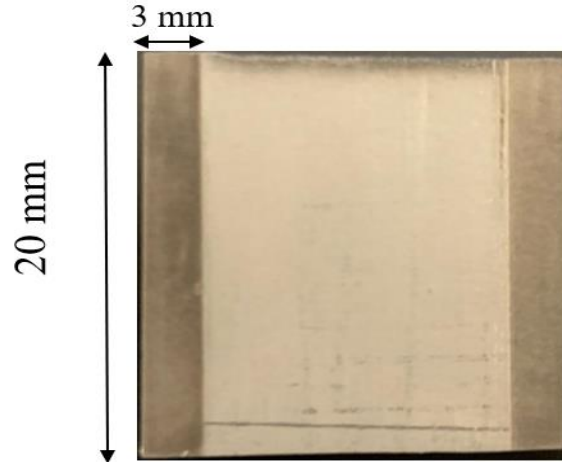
Ti-6Al-4V machine plates with micro wire EDM
